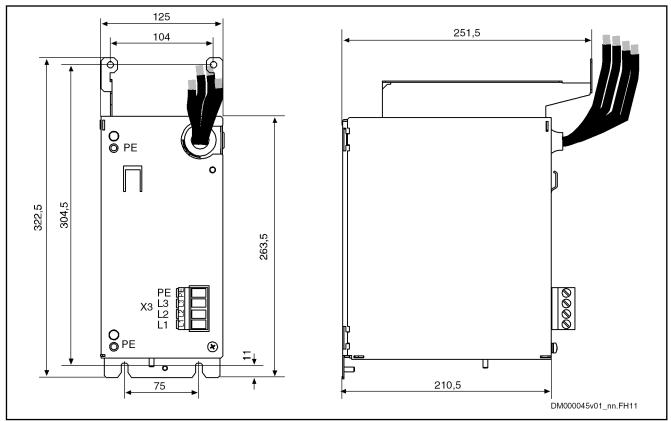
Mains filter dimensions HNK01.1A-A075-E0050
